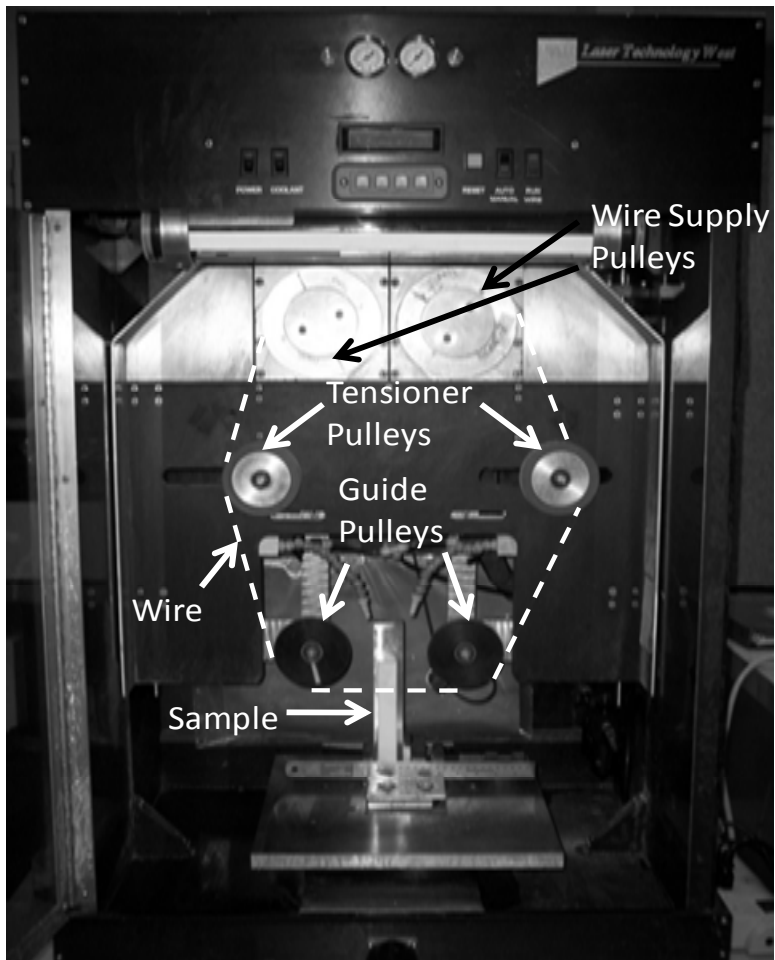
Single wire, spool-to-spool wire saw machine (DWT Inc., Millennium Model) used in waviness tests. The wire track is marked by the dashed line.
